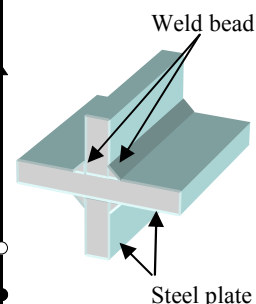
Schematic illustration of Welded Cruciform Joints
